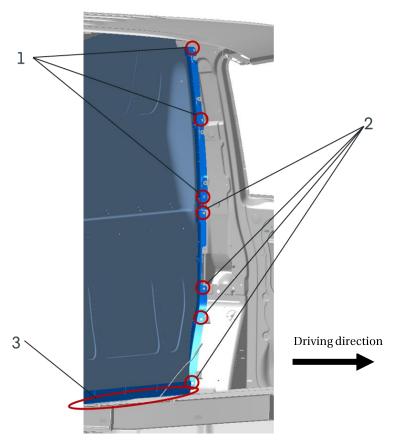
Mounting points of the standard partition – view of driver's compartment left
